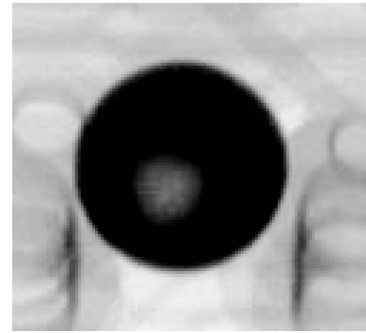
The image of a local zone of BGA chip solder joints on the circuit board
